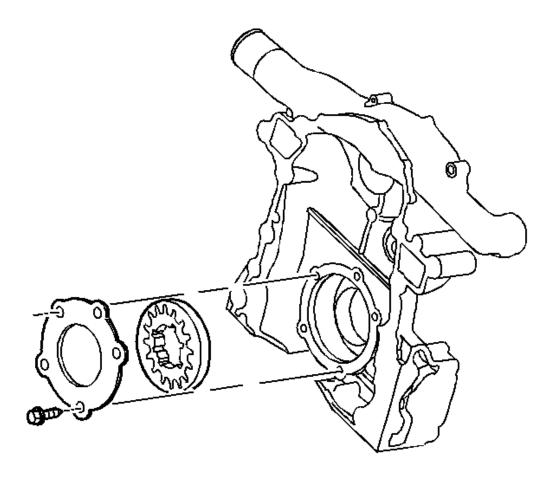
Exploded View Of Oil Pump Components Courtesy of GENERAL MOTORS CORP.
